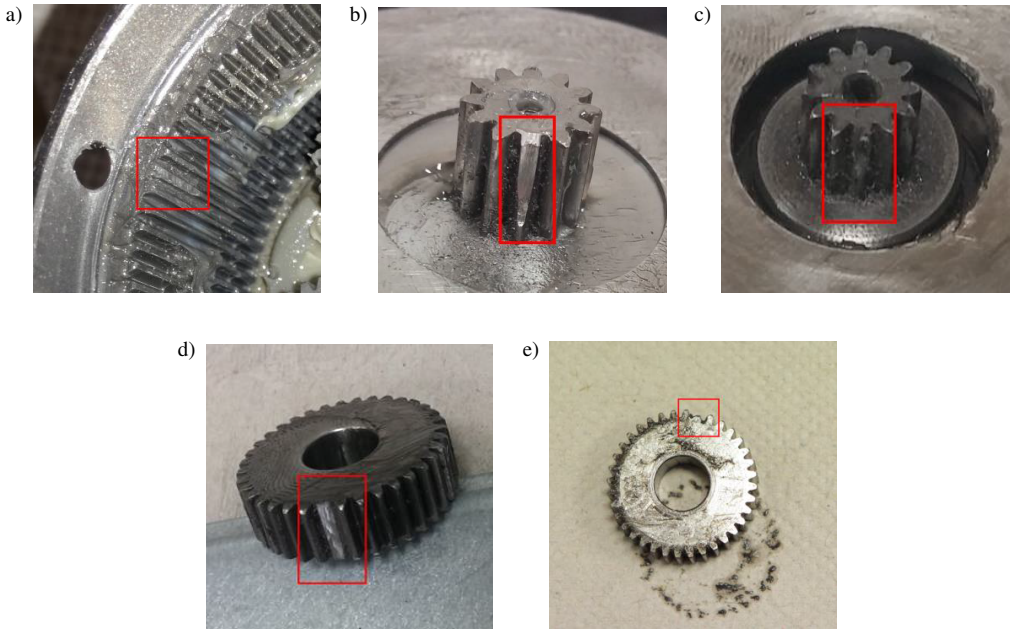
Damages implanted in the gearbox. A tooth removed from the ring gear related to the first stage of the PG (a); a tooth removed from the sun gear related to the second stage of the PG (b); a tooth removed from the sun gear related to the first stage of the PG (c); a tooth removed from one of the planet gears related to the second stage of the PG (d); a tooth removed from one of the planet gears related to the first stage of the PG (e).
